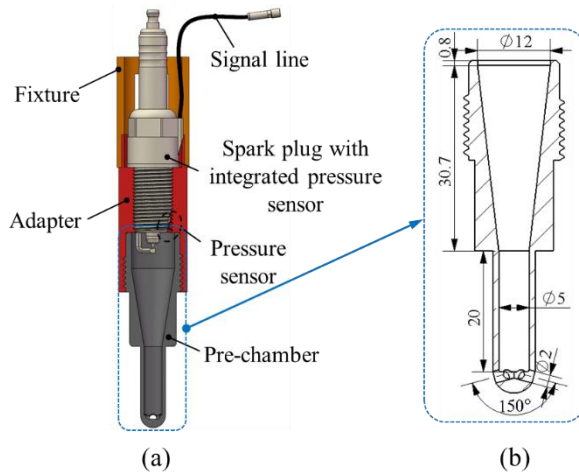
Pre-chamber assembly (a) and pre-chamber geometry (b)
